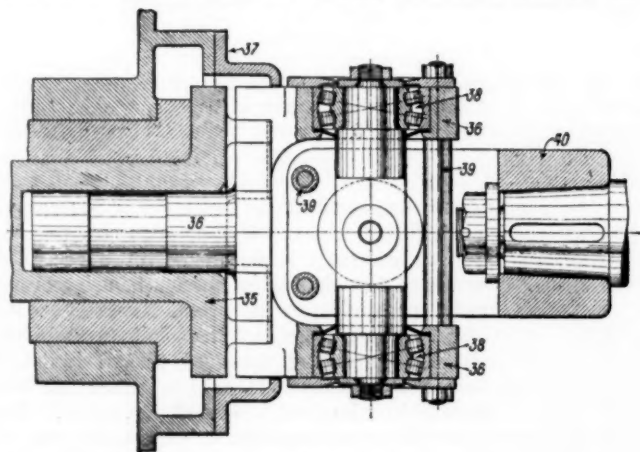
UNIVERSAL JOINT IN GEAR POWER TRANSMISSION ON TURBO-CONDENSING LOCOMOTIVE
